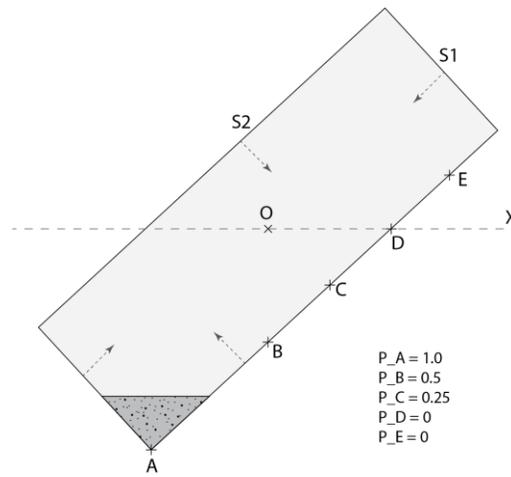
A hypothetical scenario that liquid material coats a rectangular geometry using a rotational molding machine.
